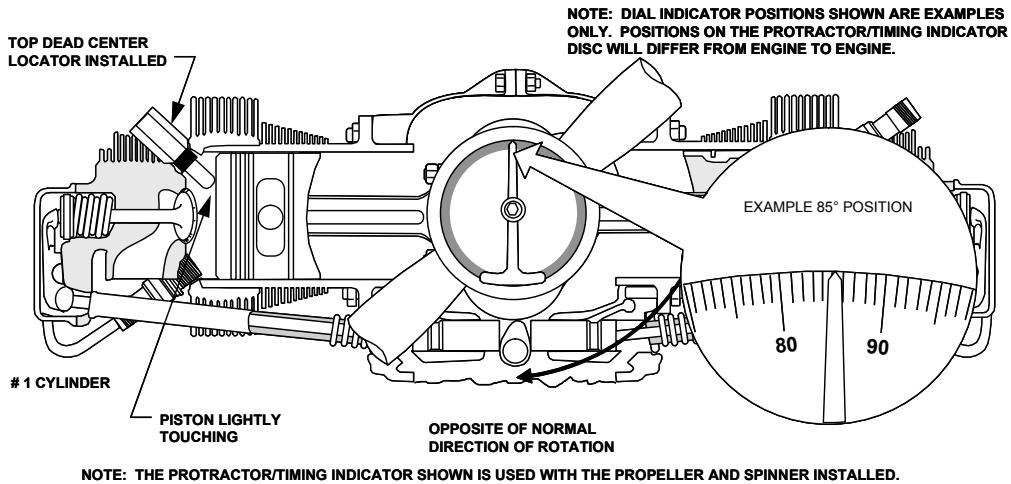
No. 1 Cylinder Positioned at Top of Intake Stroke
